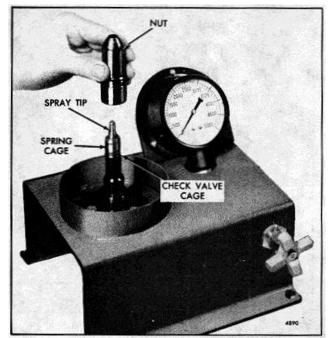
Installing Injector Valve Parts on Auxiliary Tester J 22640
